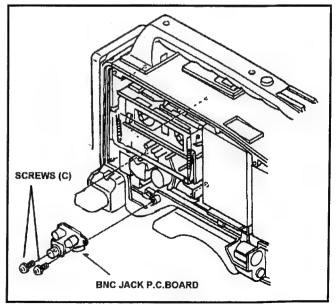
Removal of BNC JACK P.C.Board
